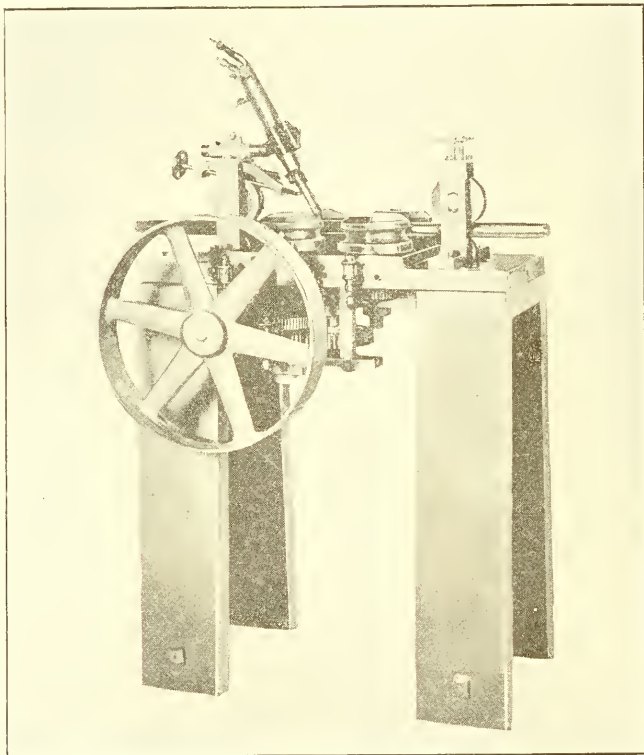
Single-Torch Tube Welding Machine.
